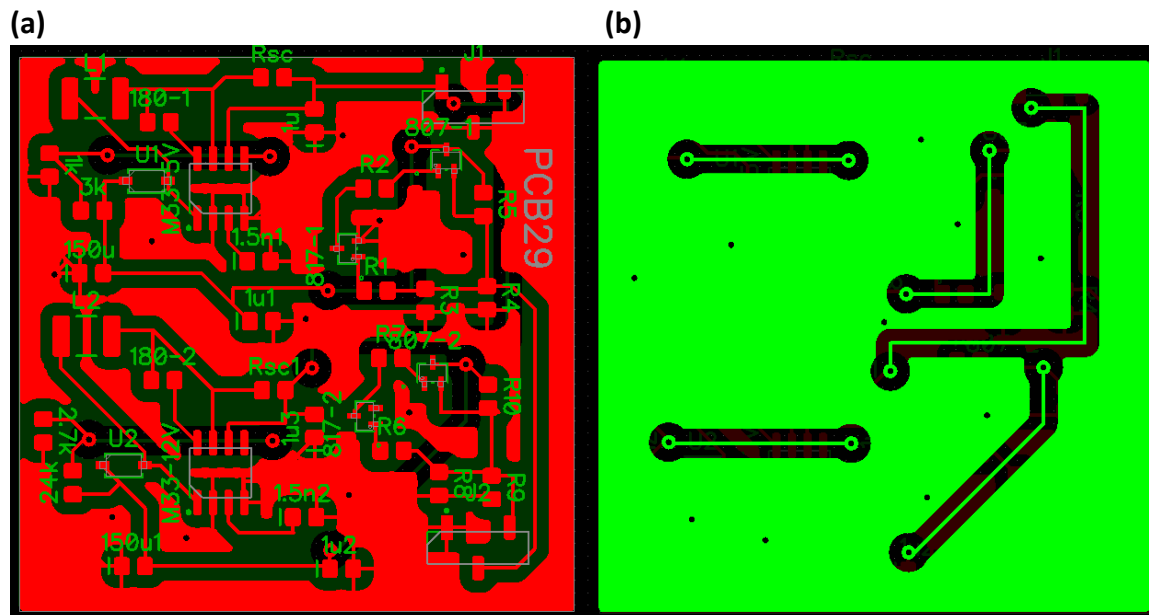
PCB Design of circuit 4 for (a) Top Side; (b) Bottom Side
